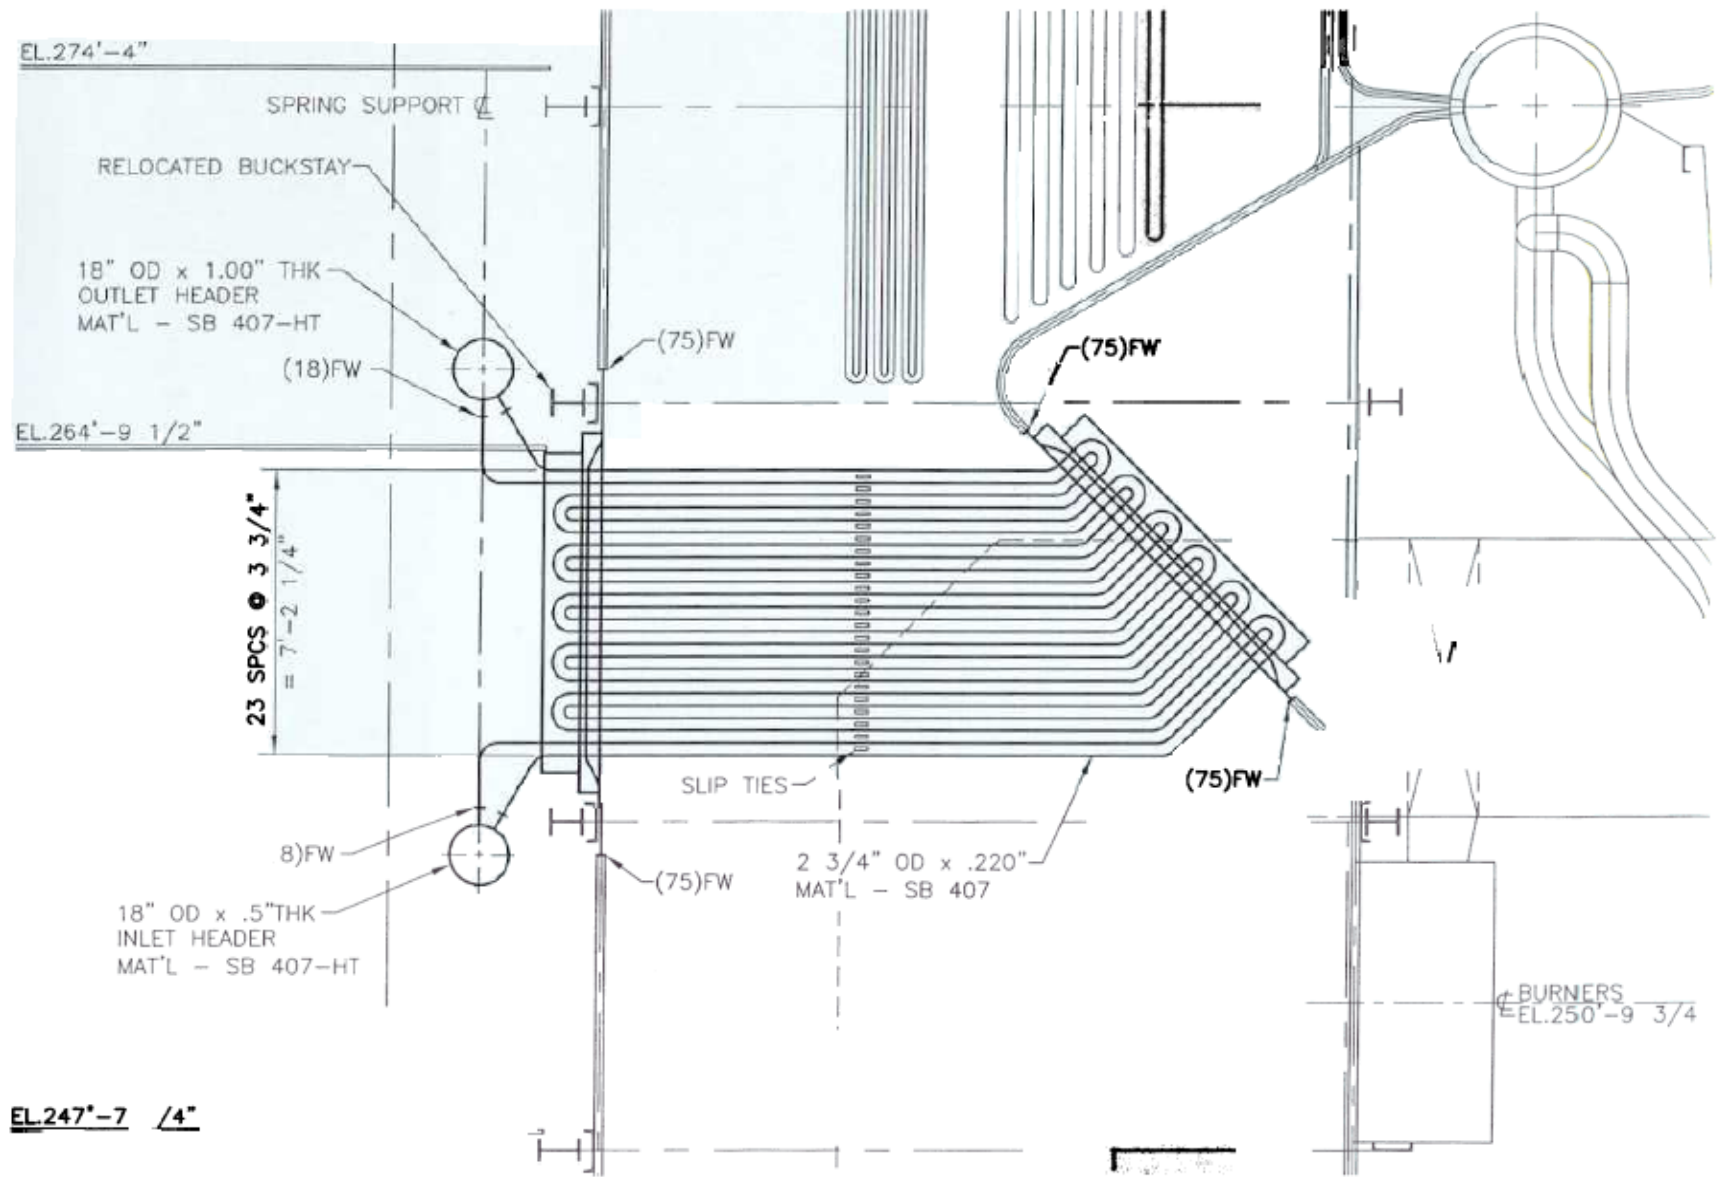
Internal HTHP Air Heater – Selected View 2
